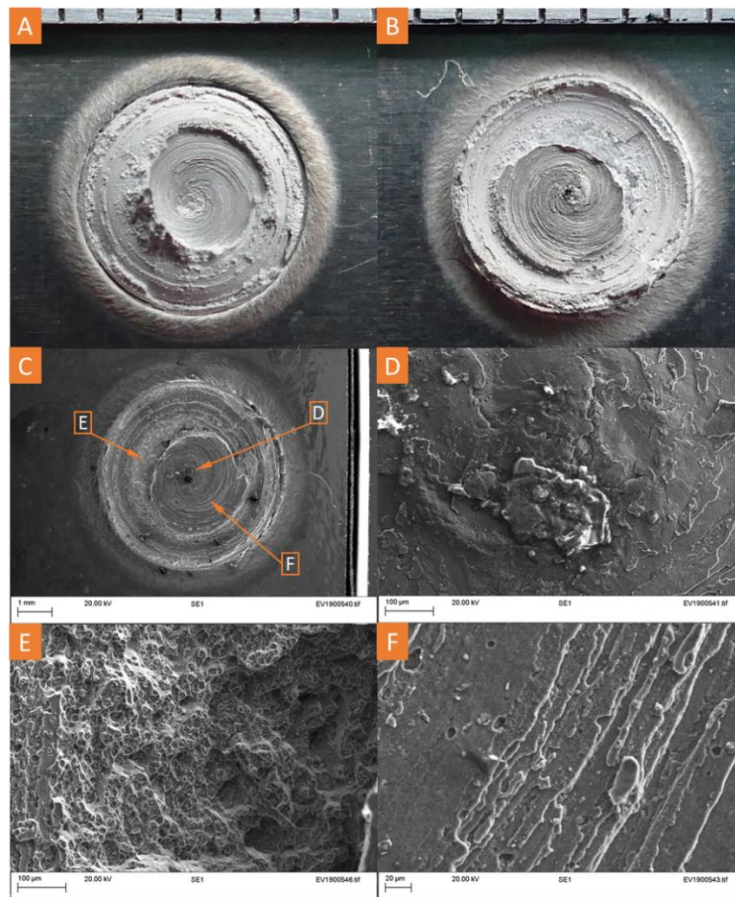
Fracture surfaces of a through interface failure mode of RFSSW AA2024-T3 condition W1 (RS = 1000 rev/min; PD = 2.0 mm):
